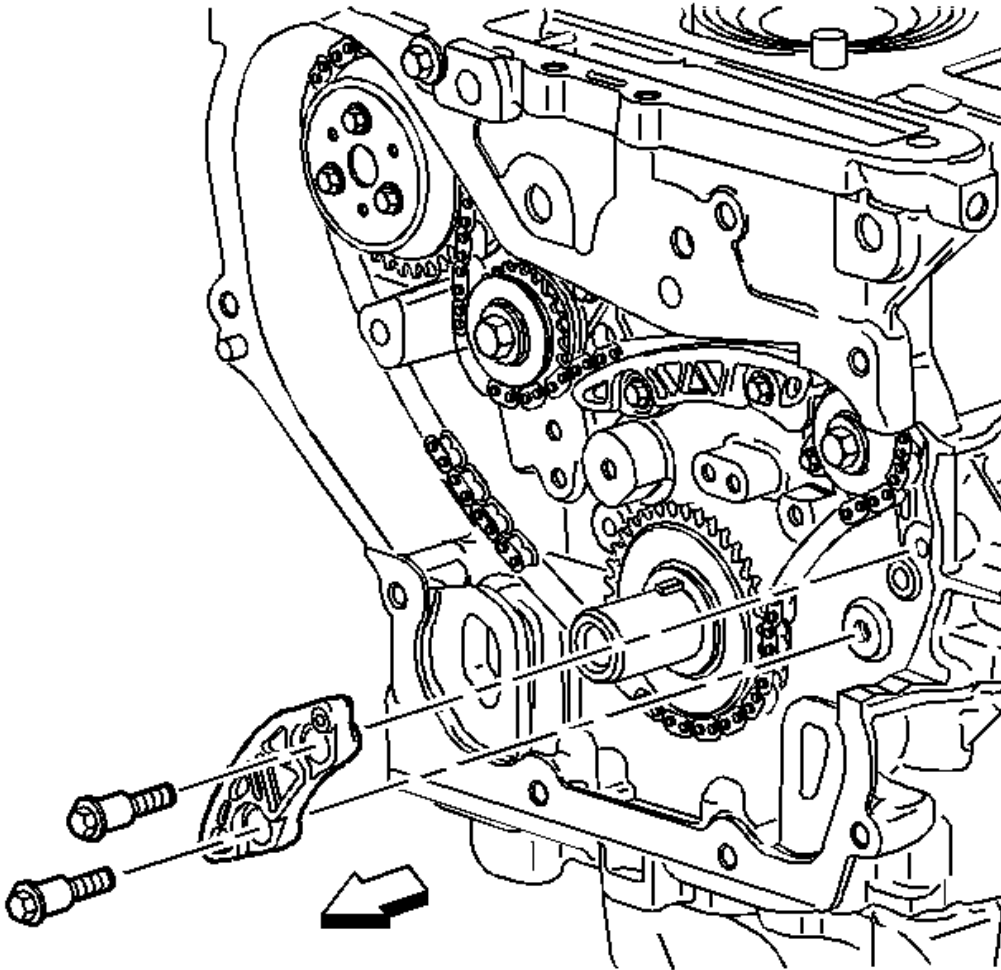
Exploded View Of Small Balance Shaft Drive Chain Guide
